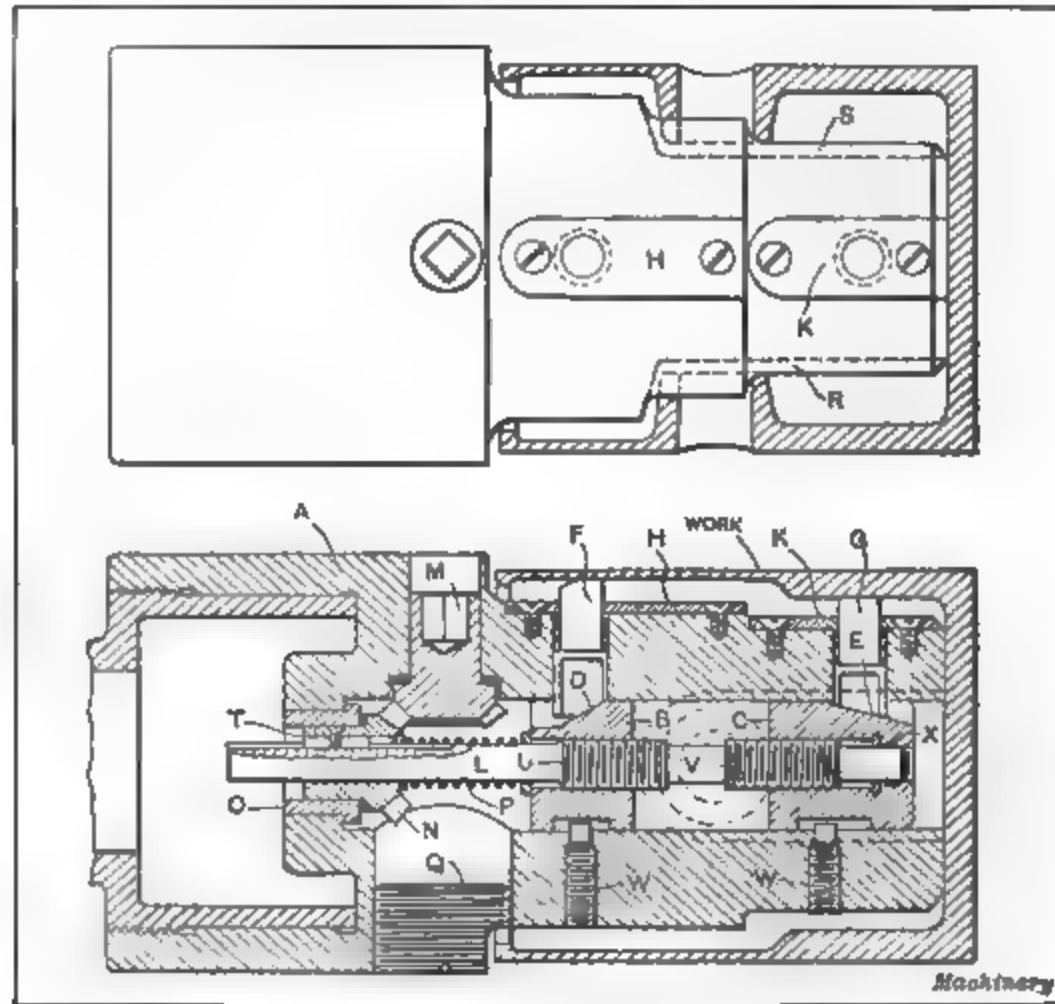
Special Chuck for holding Gas Engine Pistons Internally
